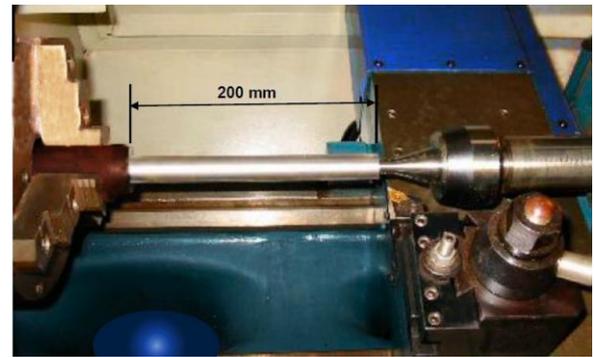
Specimens machining on the lathe according to sketch in the attached figure.
